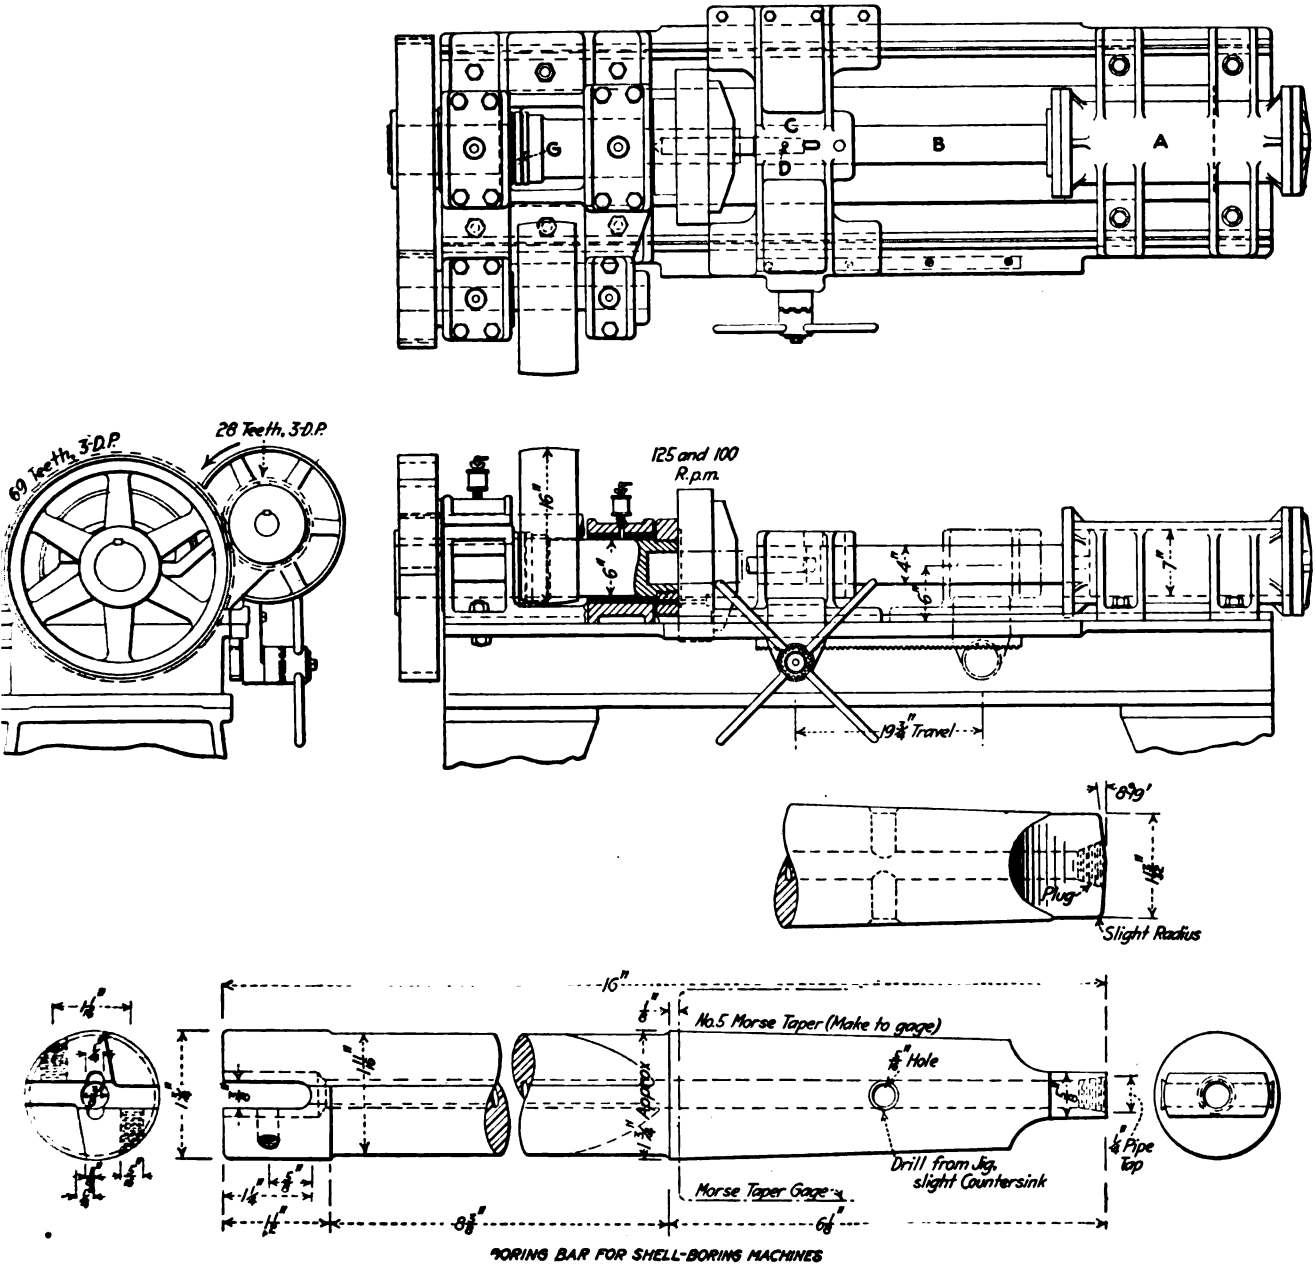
THE HIGH-EXPLOSIVE SHELL-BORING MACHINE
